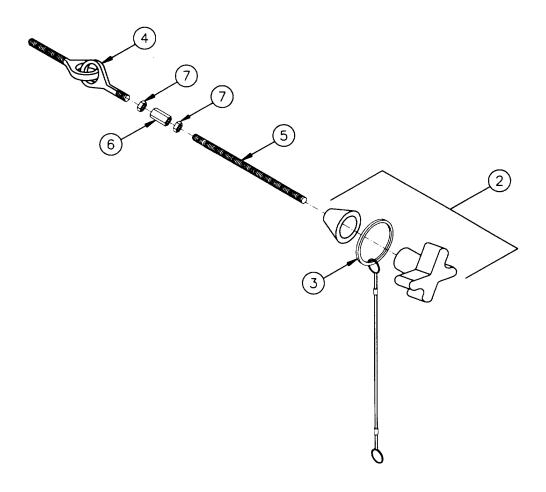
KNOB ASSEMBLY, CABLE REEL
